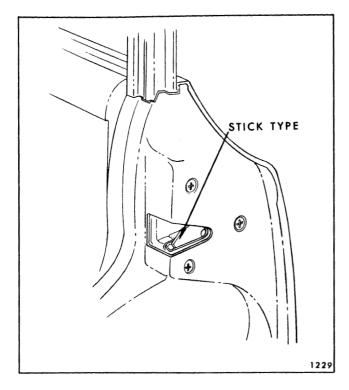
Door Lock Fork Bolt And Rotary Bolt
